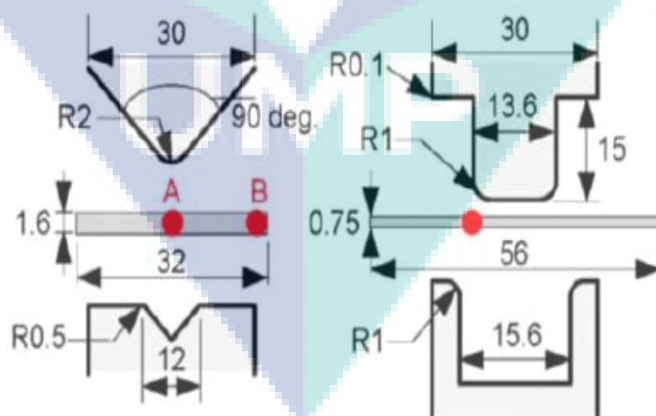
Geometries of tools and steel sheet for hat-shape and V-shape
